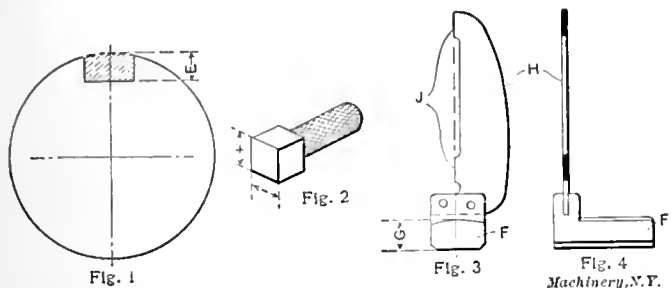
Undesirable Method of Gaging Keyway Depth. Fig. 2. Limit Gage for Width of Keyway. Figs. 3 and 4. Gage used in Conjunction with Center-head, Fig. 5, for Determining Depth of Keyway and Parallelism of Sides with Radial Line through its Center.
